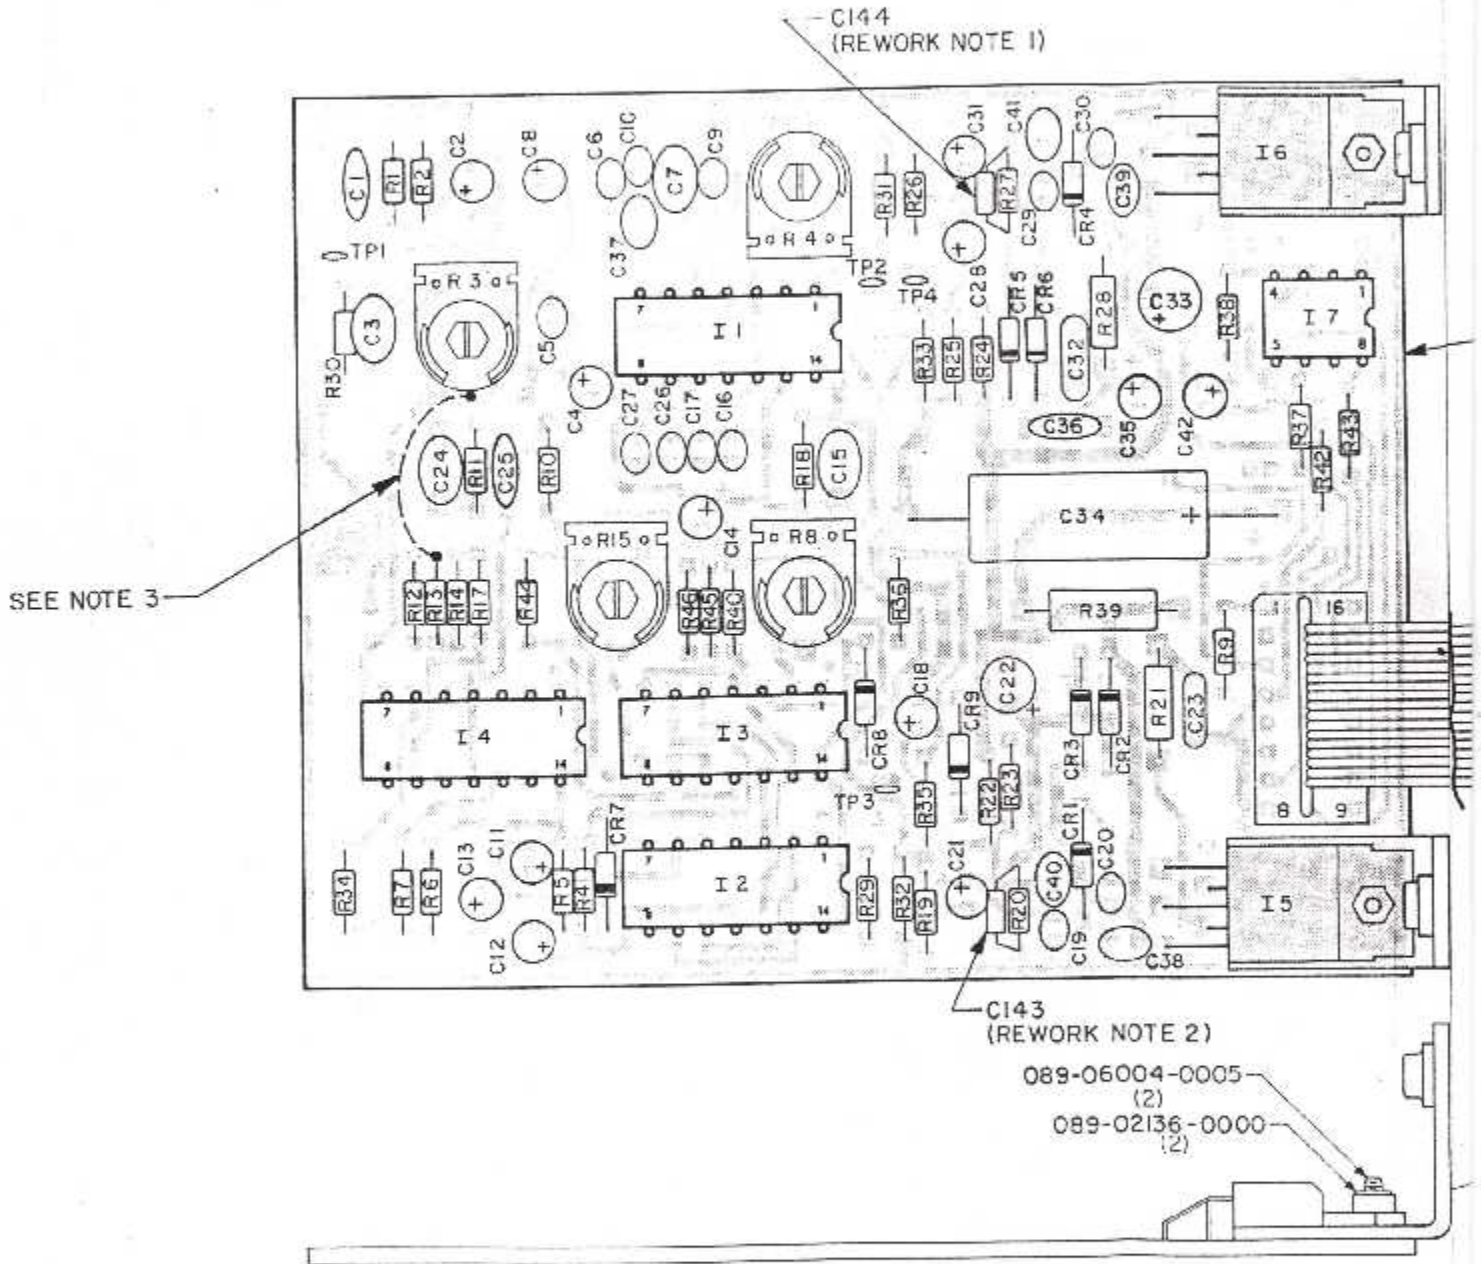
AUDIO BOARD ASSEMBLY DRAWING
